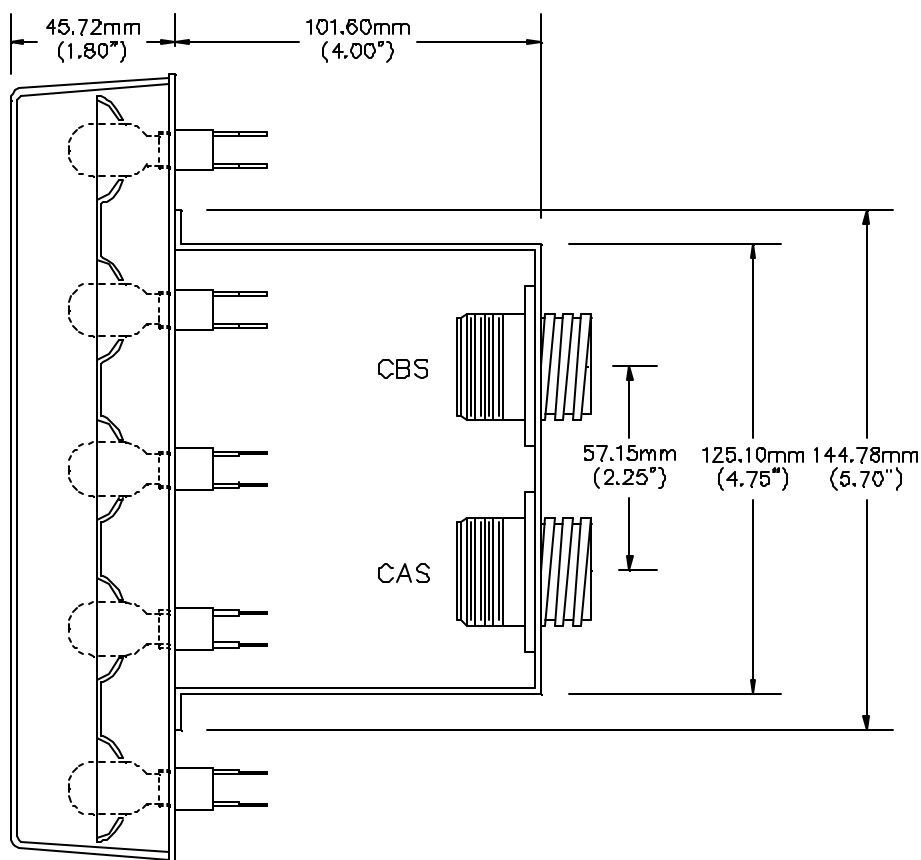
Side View of Model 510 and 520 PMM with Full Panel Molding.
